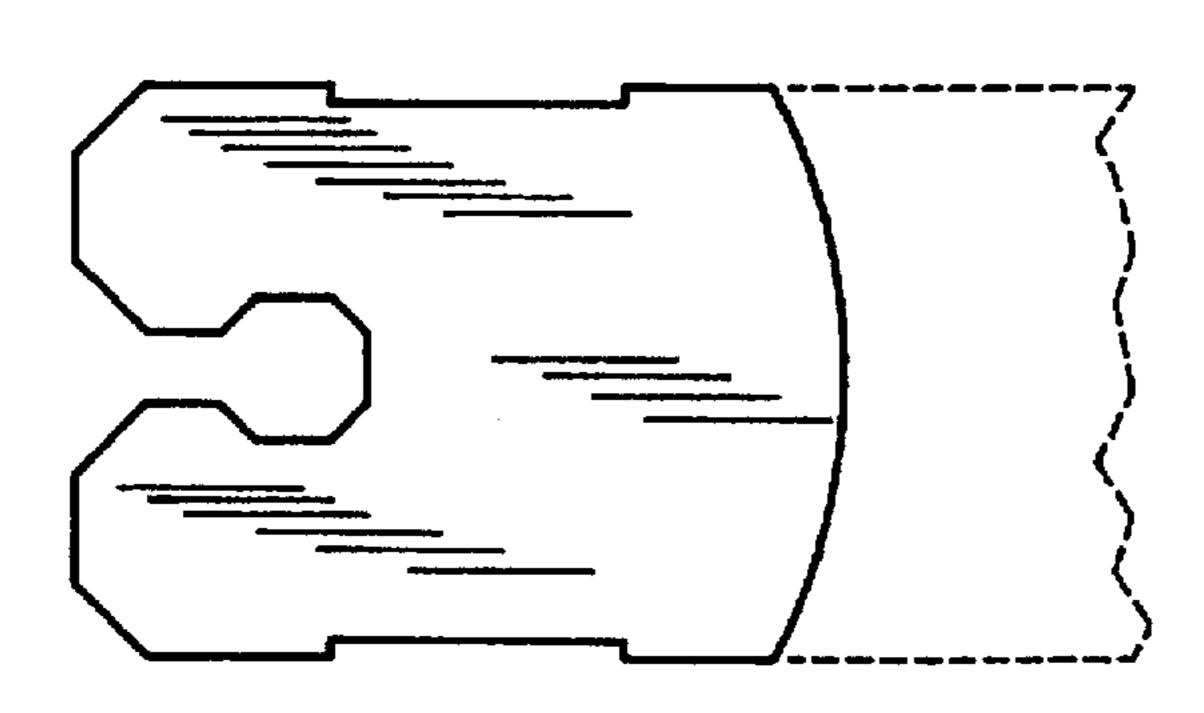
is a top plan view, the bottom plan view being identical; and,
